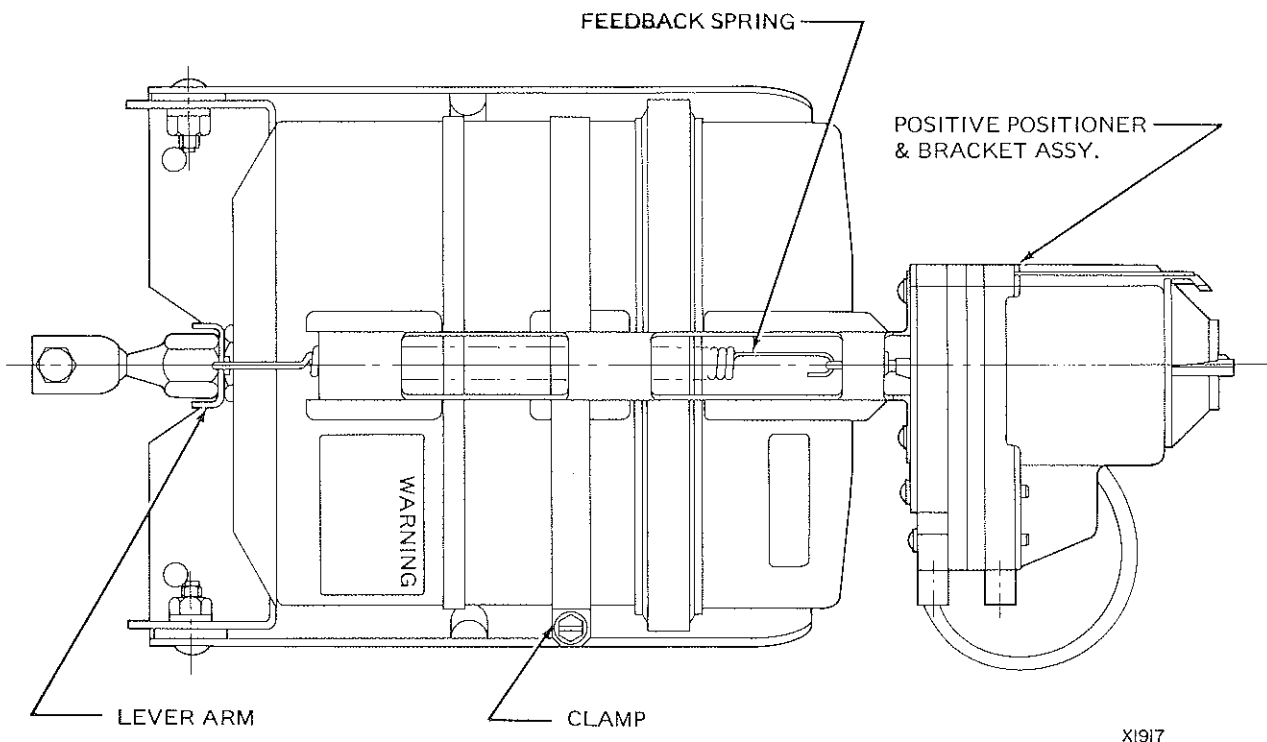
MP904 Showing Mounting of Positive Positioner.
